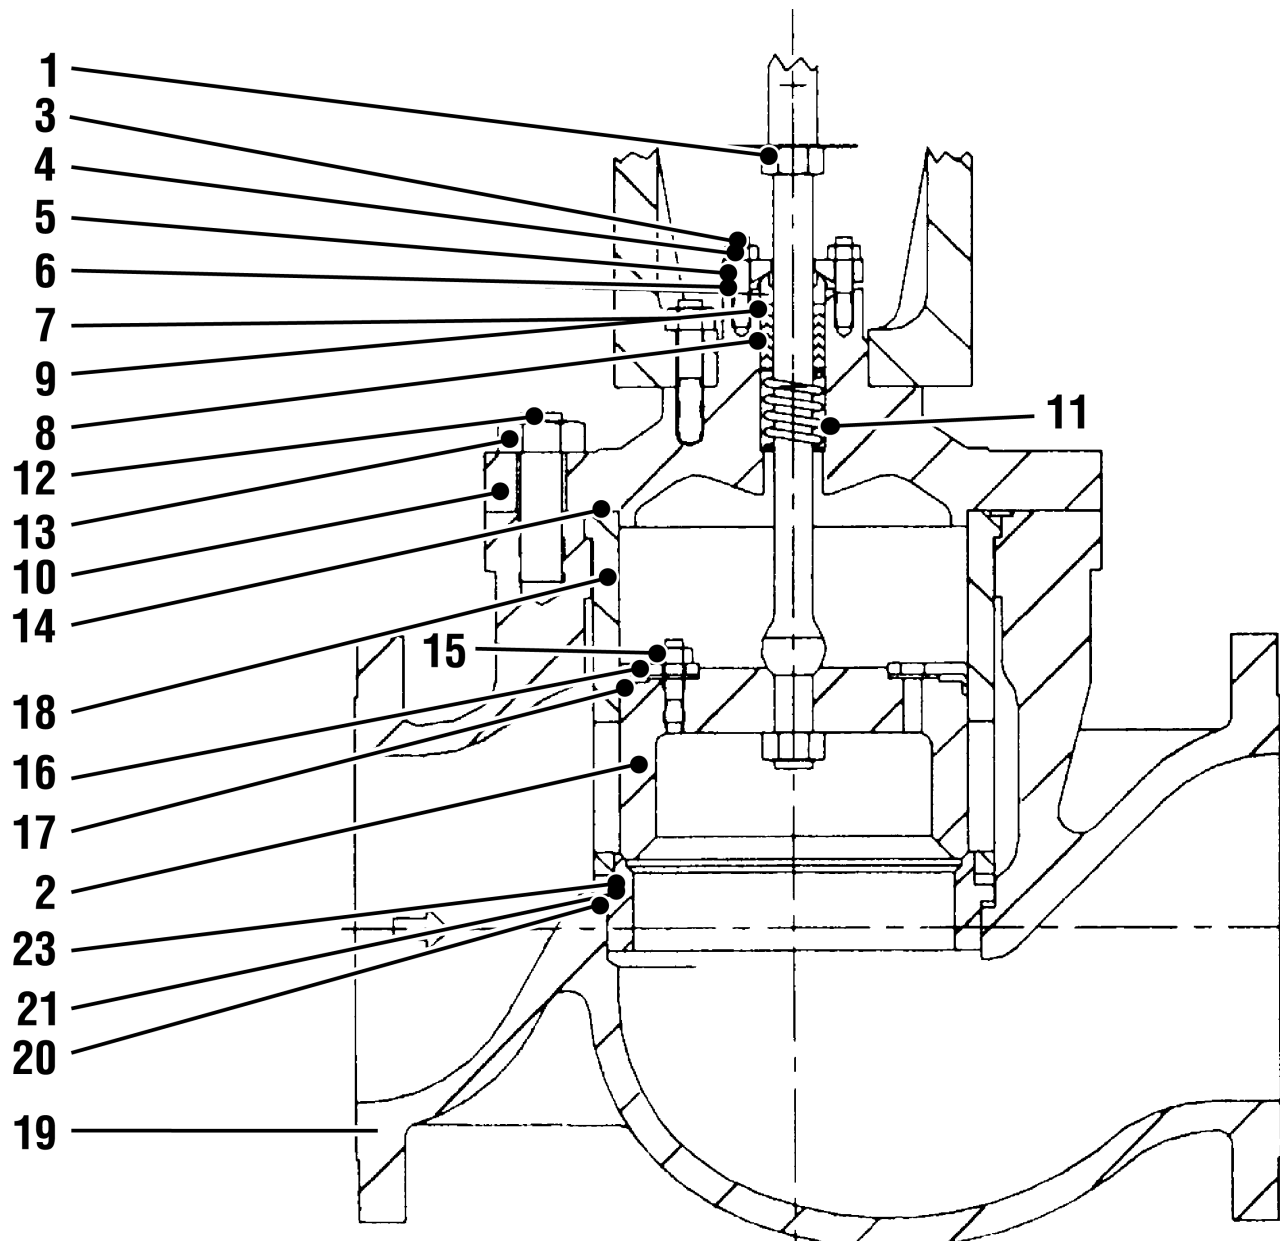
Valve with Teflon Chevron Packing - Parts Diagram
